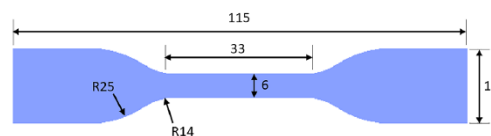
Dimensions of the tensile test specimen following the ASTM D638, type IV standards. The dimensions are expressed in mm and the specimen's thickness is 3.20mm. Adapted from reference (3).
